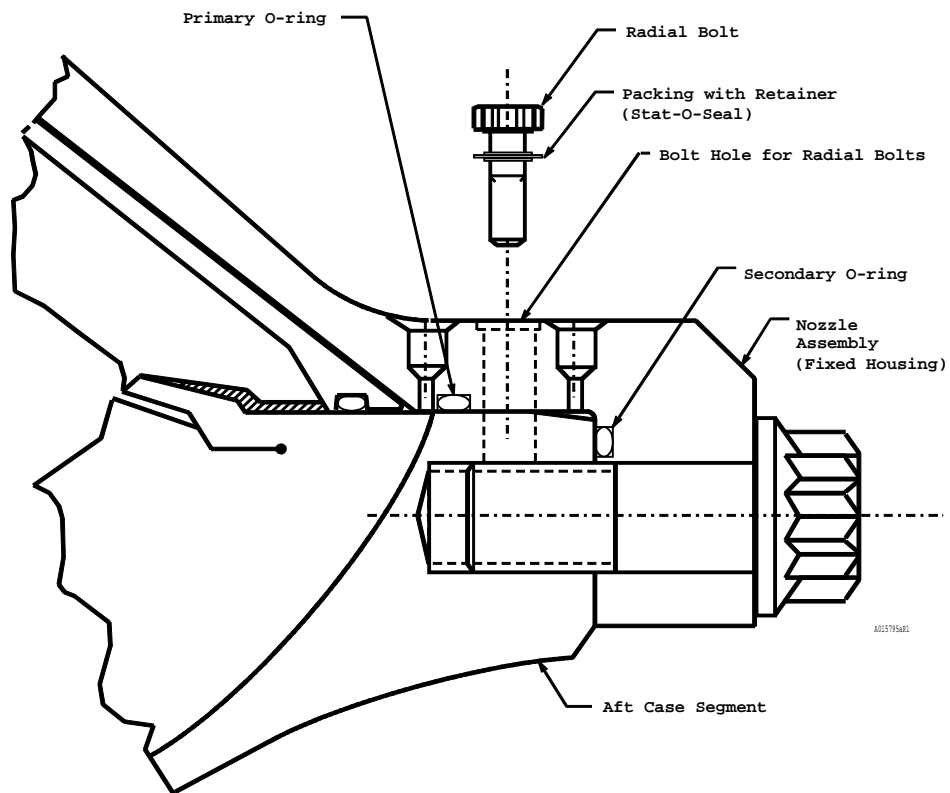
Case-to-Nozzle Joint, Radial Bolt, and Packing with Retainer
